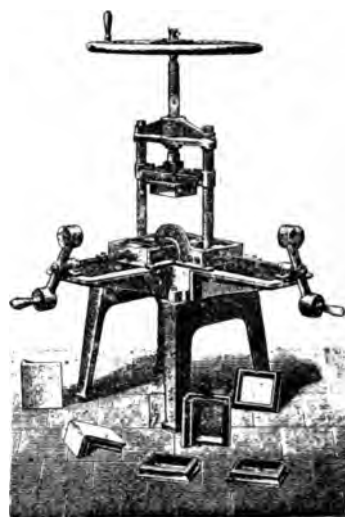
Press for welding Stove Quarries (Schlickeysen).
